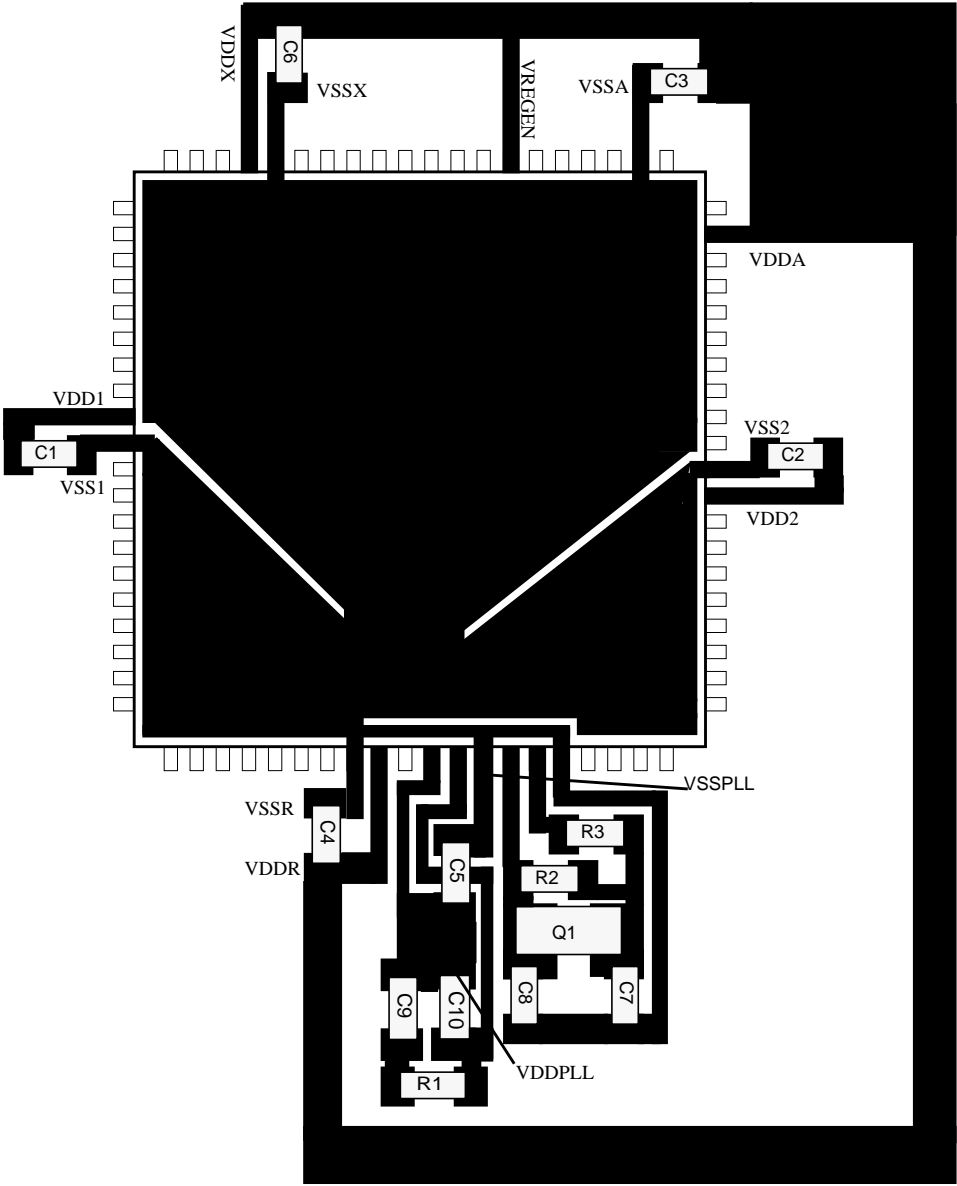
Recommended PCB Layout for 80QFP Pierce Oscillator
